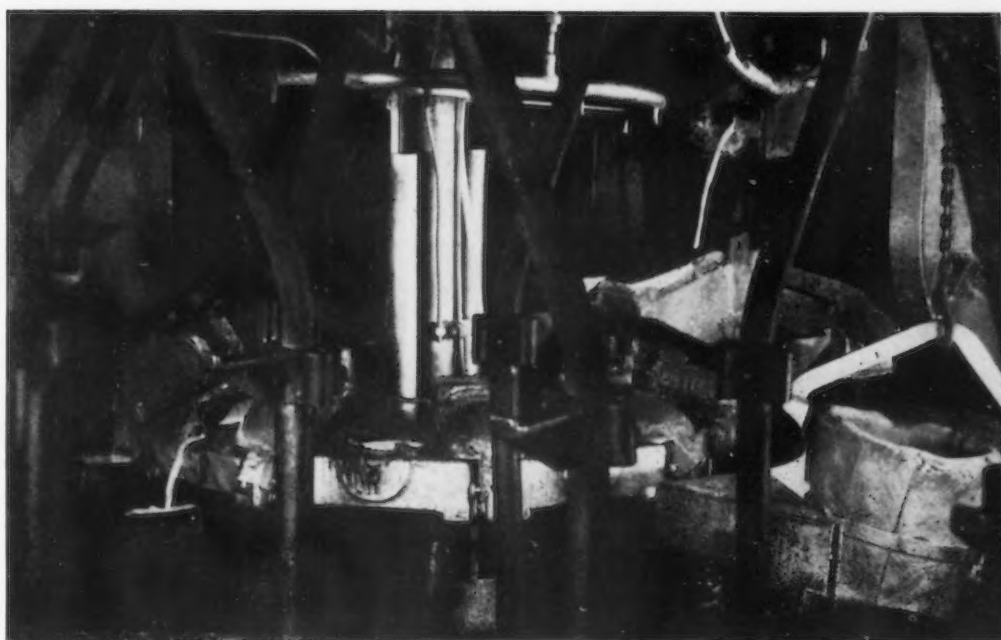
This automatic pouring car is being filled from a holding furnace prior to automatically pouring crankshafts.
